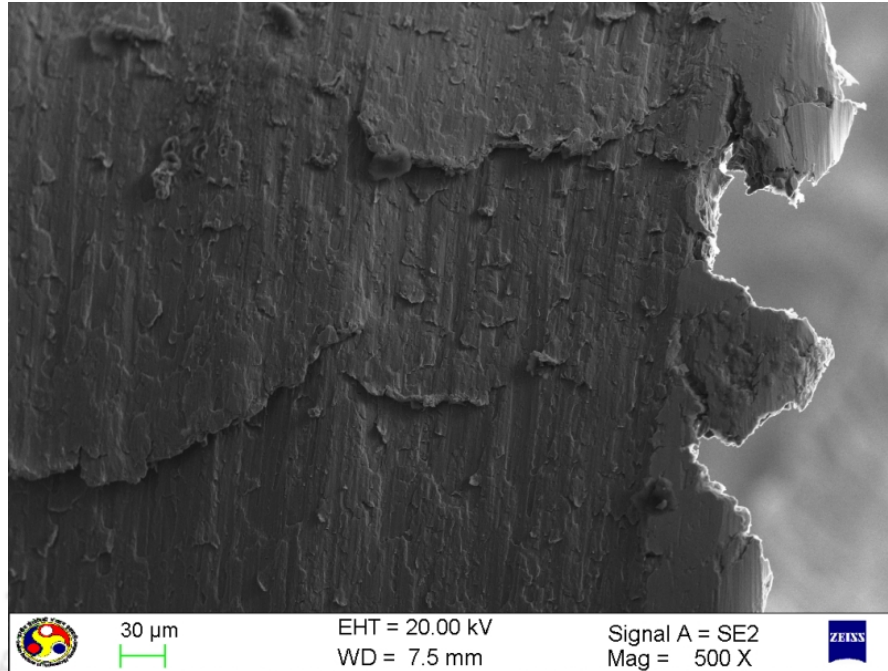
(b) Serrated edge of the chip produced by WC-Co-5 wt.% CaF₂ cutting tool
